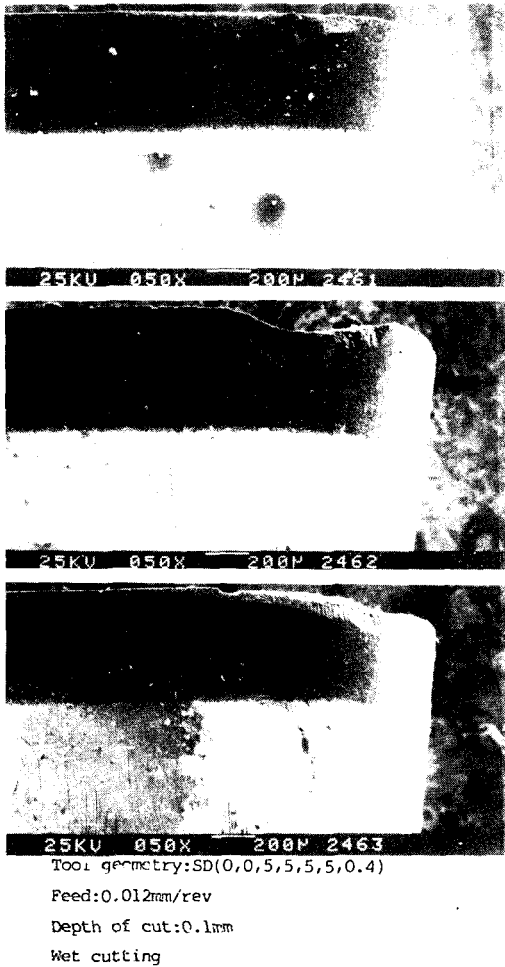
The flank wear of sintered diamond tools at a cutting speed, [(a) V : 10m/min, (b) V : 20 m/min, (c) V : 70m/min]
